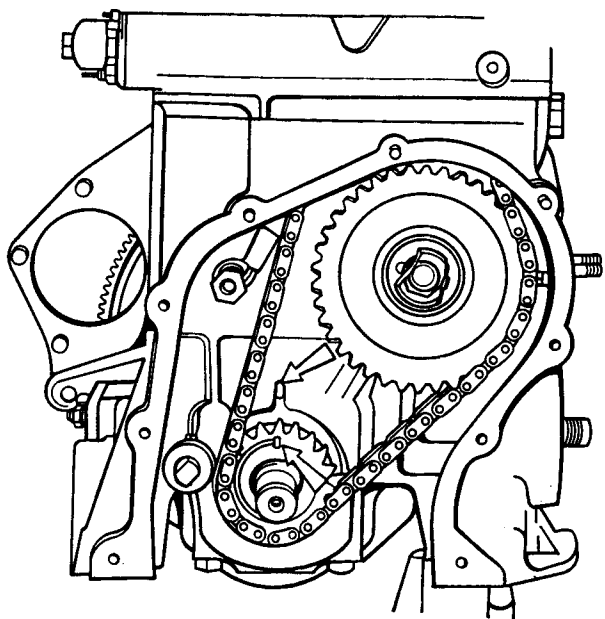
Alignment of Timing Marks on Crankshaft Sprocket and on Cylinder Block
